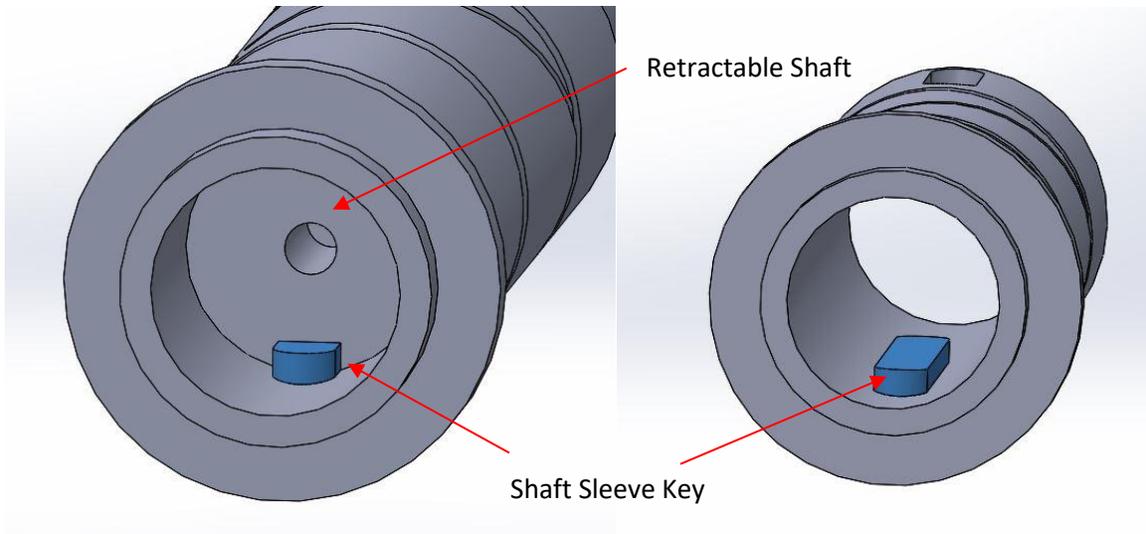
Drive End Iteration #1, Outboard Side of Shaft Sleeve
